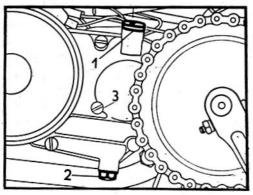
Oil filling and drain screws 1- Screw closing the filling hole, 2- Screw closing the drain hole, 3- Control hole.
